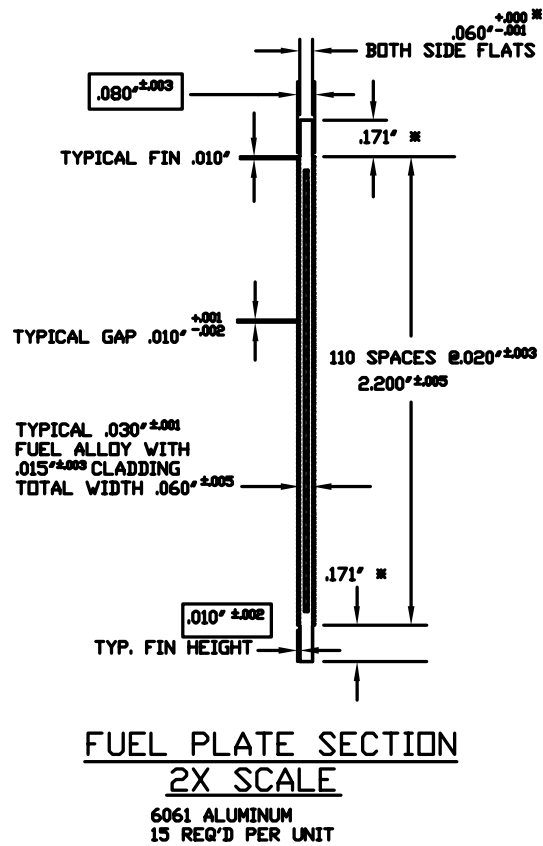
Engineering drawing of MITR-II HEU fuel plate [11]
